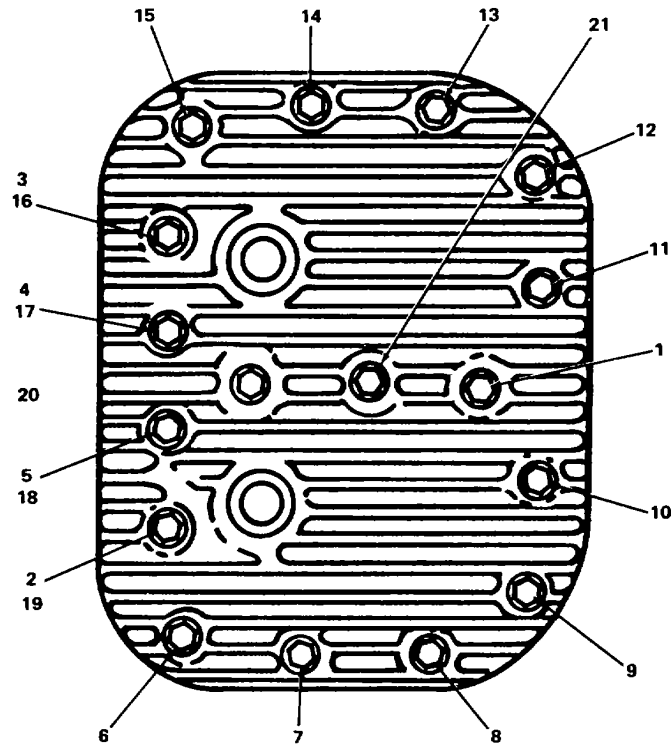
Cylinder Head Bolt Tightening Sequence
